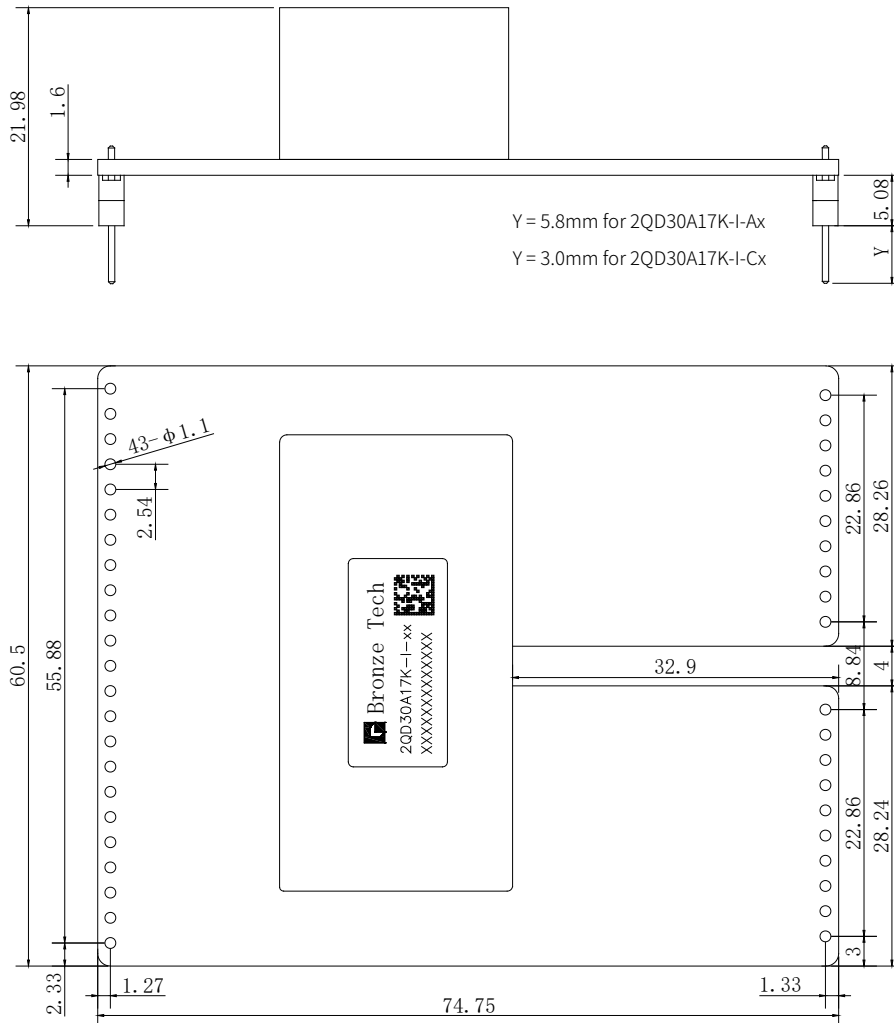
Mechanical drawing of 2QD30A17K-I-xx
